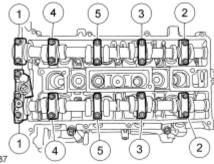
Locating Camshaft Lobe Courtesy of FORD MOTOR CO.
